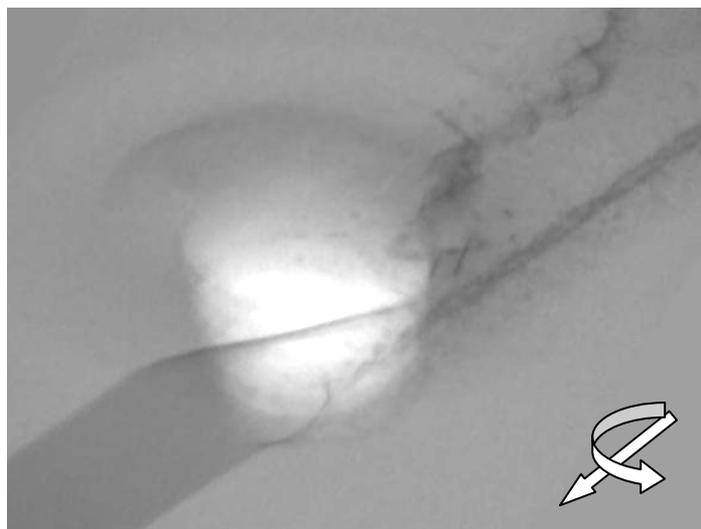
X-ray radiographic image of a weld FSW-T1. This is the same weld as seen in Fig.3.0 and is approximately the same scale and view angle. The darker grey is the copper and the light patch the tool exit hole. From reference [10]
